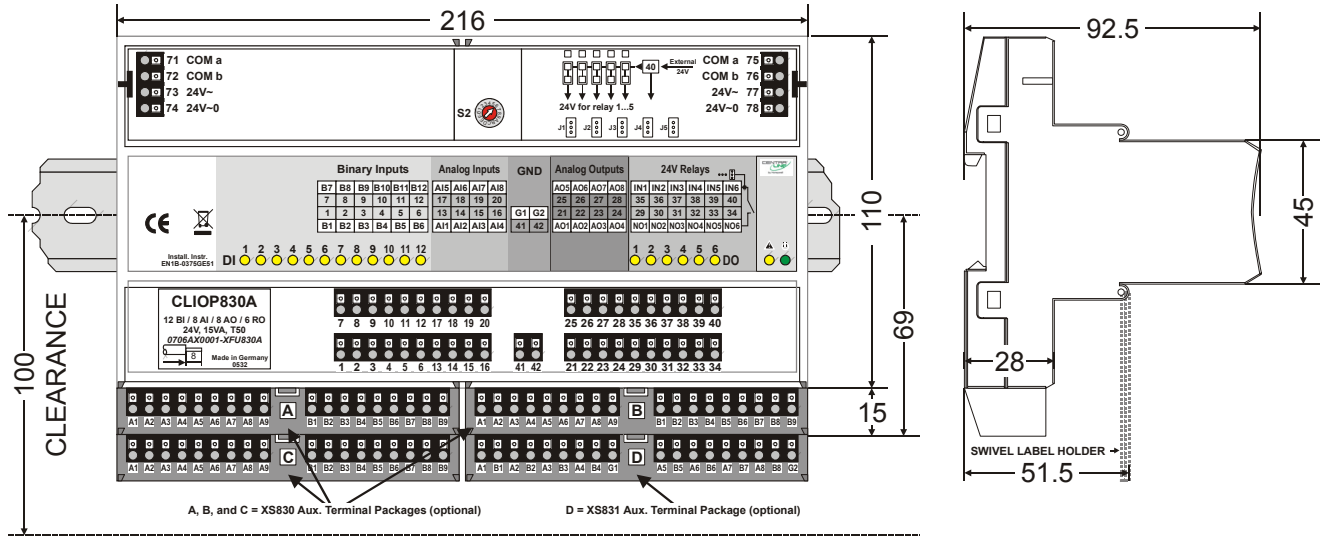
Mixed I/O Module CLIOP830A (shown with four auxiliary terminal packages), dimensions (in mm)
